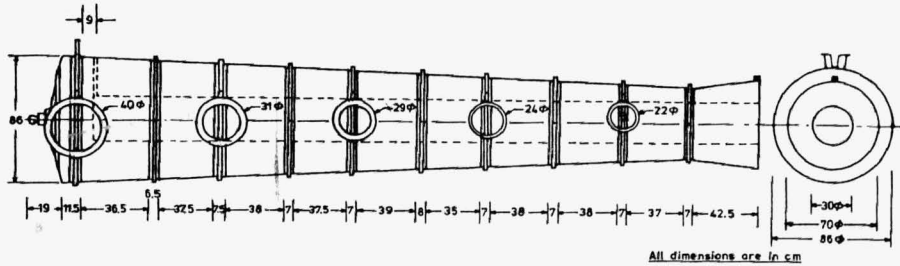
Schematic of the forge welded iron cannon showing major dimensions.
